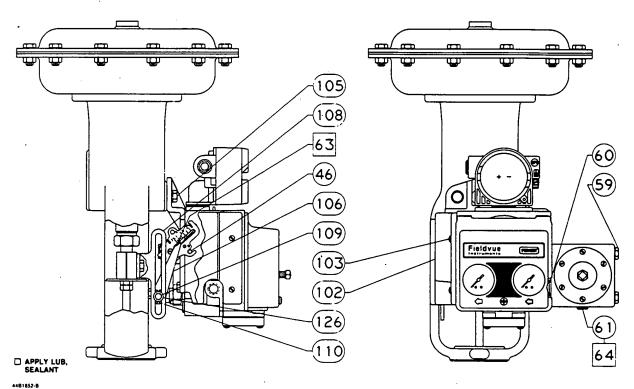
Type DVC5010 Series Digital Valve Controller Mounted on Type 657/667 Size 30-60 Actuator with Integrally Mounted Filter Regulator
